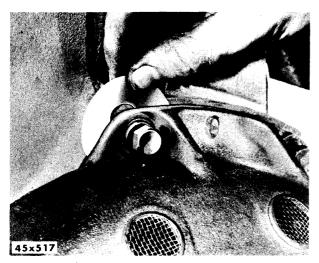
Installing Shim Between Engine Block and Clutch Housing
